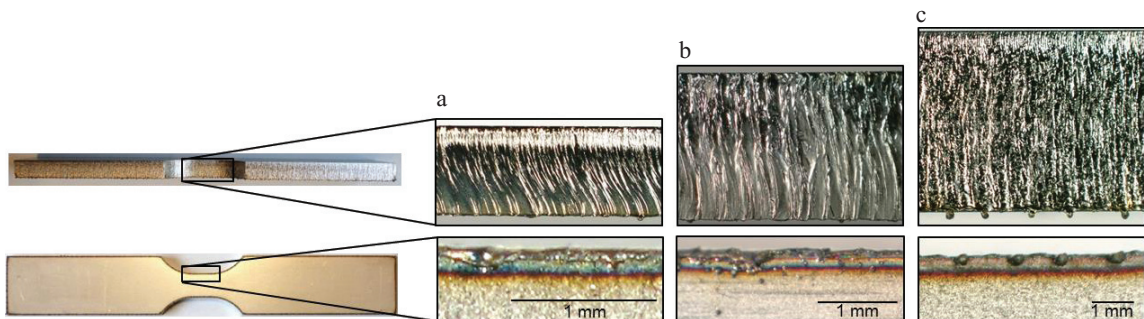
Surface relief and burr, respectively, after laser cutting of (a) 2 mm, (b) 4 mm and (c) 6 mm sheet thickness.
